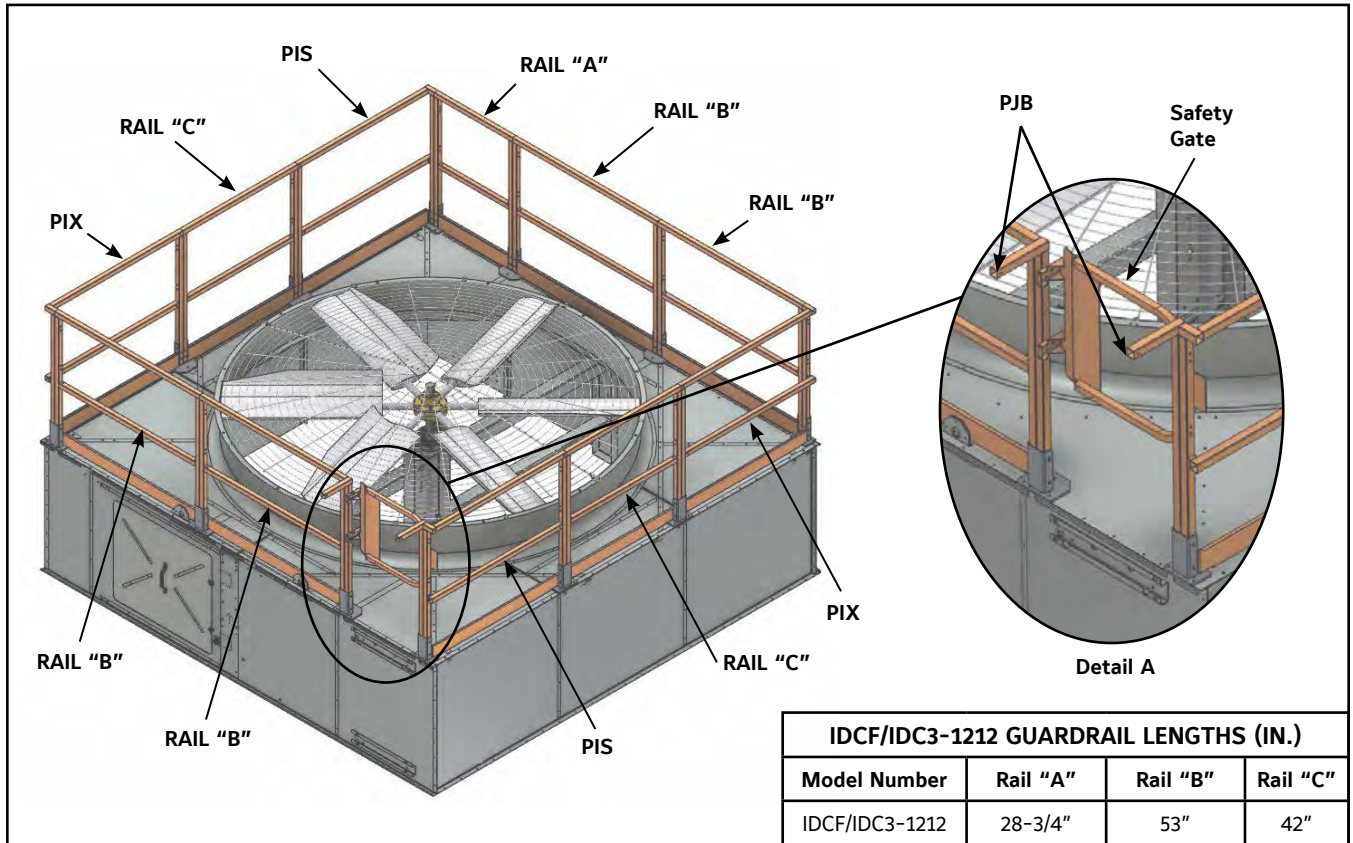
Top Perimeter Guardrails - IDCF/IDC3-1212
